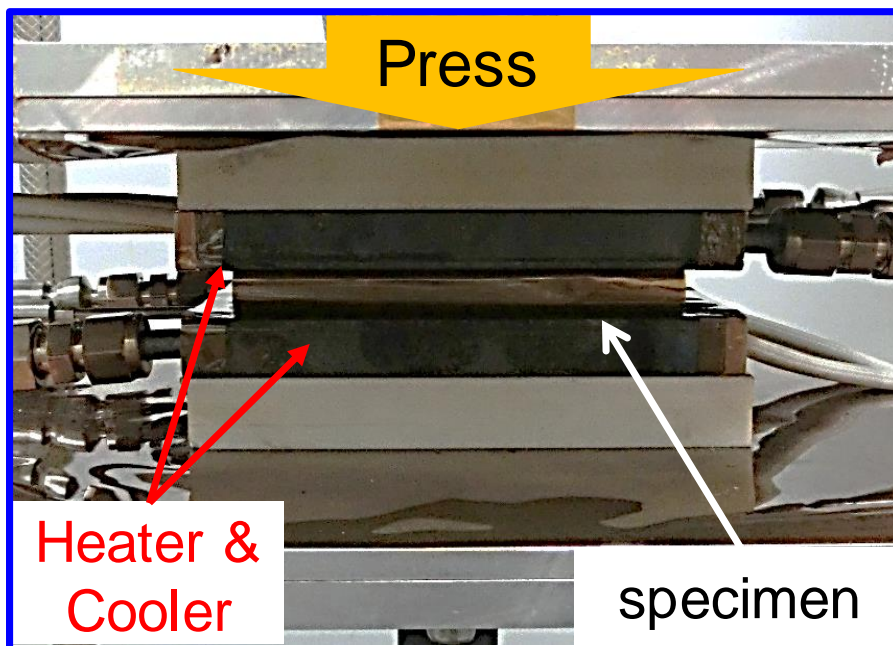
Photo of molding equipment setup using heater & cooler plate and hydraulic universal tester.
